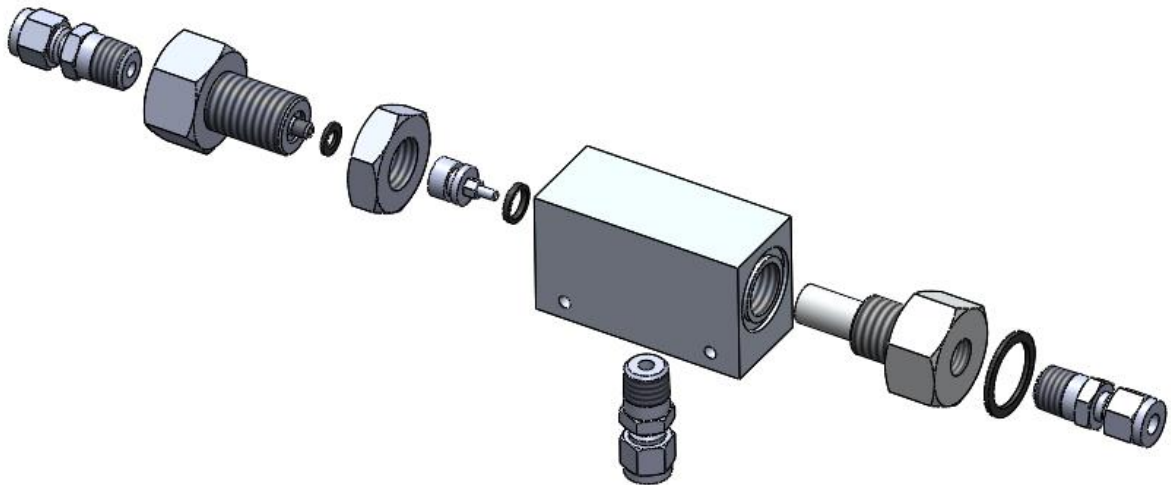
11- Solid Works exploded view of the chosen geometry for the experimental ejector.
